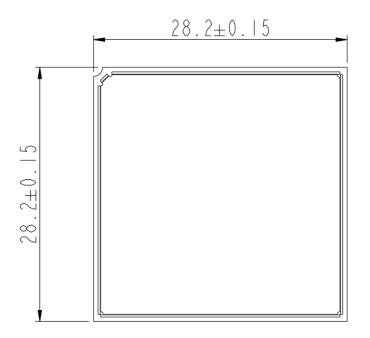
LE910S1 Mechanical Dimensions (Top view)
